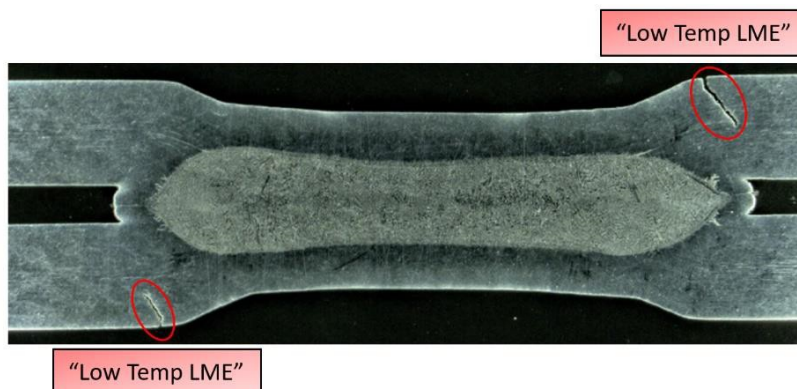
Weld cross-section showing examples of LME cracks, judged to be Low Temperature type due to their location just outside of the electrode imprint area.
